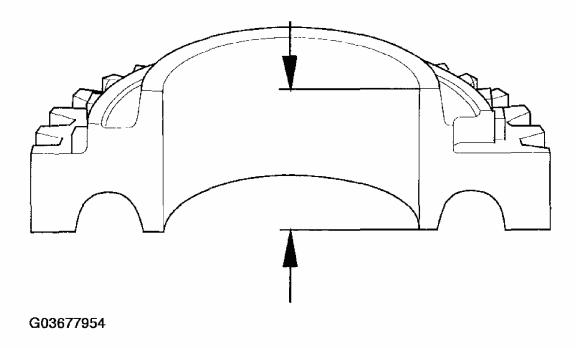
Measuring Thickness Of Second Gear Courtesy of AMERICAN HONDA MOTOR CO., INC.
